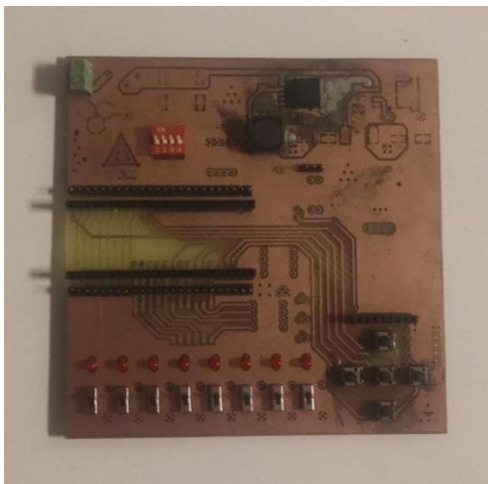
First prototype of the FPGA carrier board PCB with component assembled and soldered.
